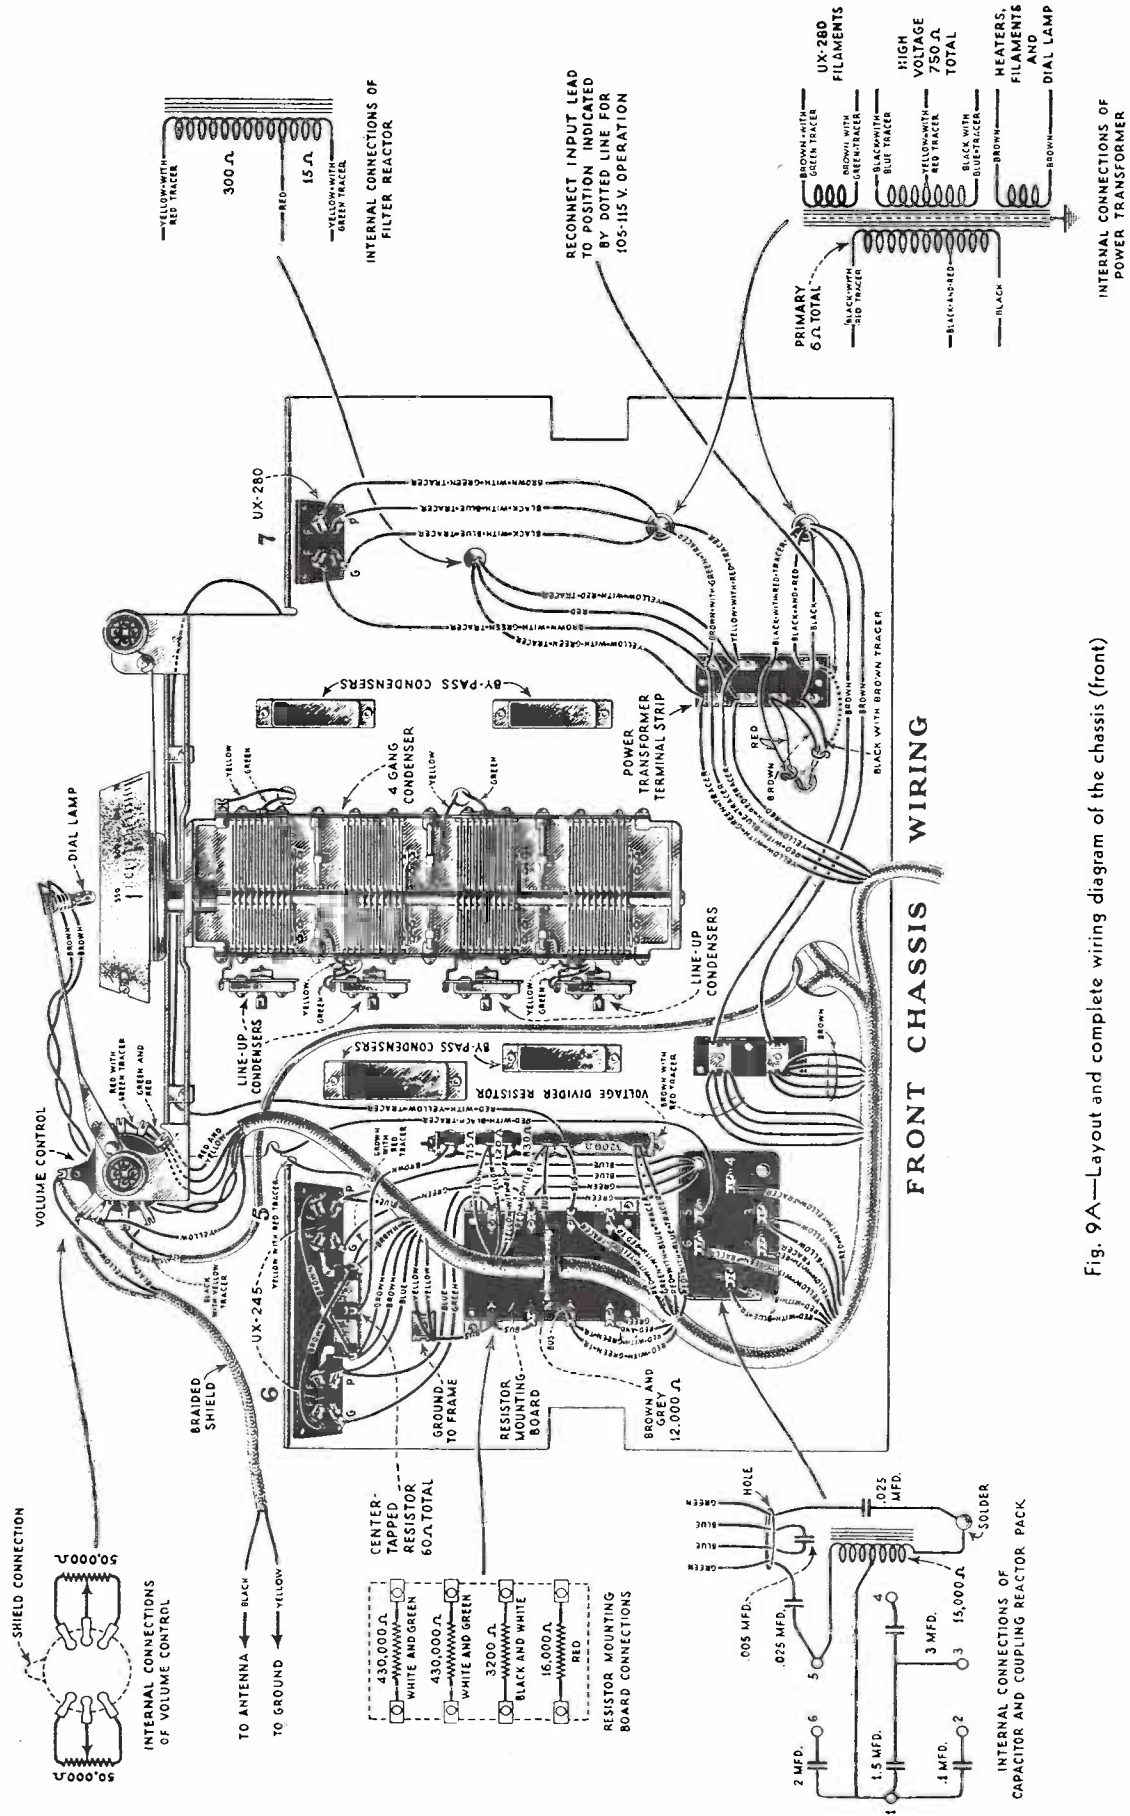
A—Layout and complete wiring diagram of the chassis (front)
